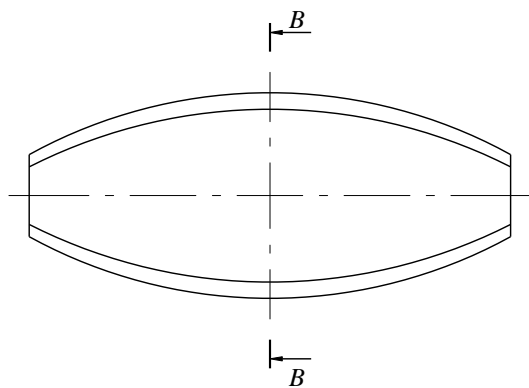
Option of an improved working knife for a staking machine *B-B
